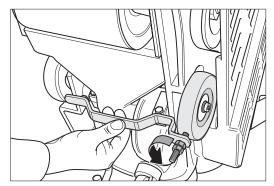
Remove the current setting fixture from the right-hand wheel (seen from below).
